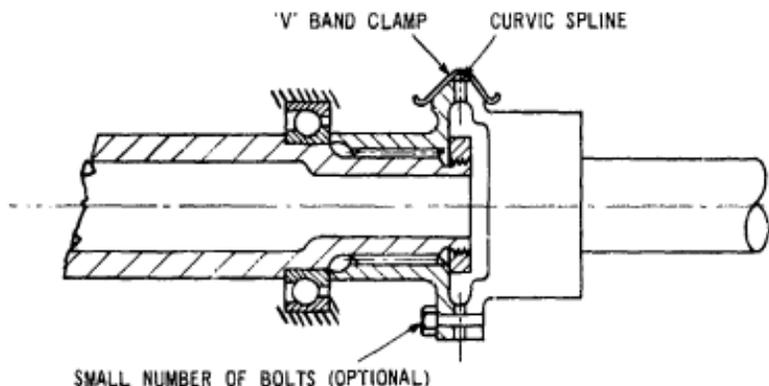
Curvic Spline Shaft Attachment, Quick-disconnect
